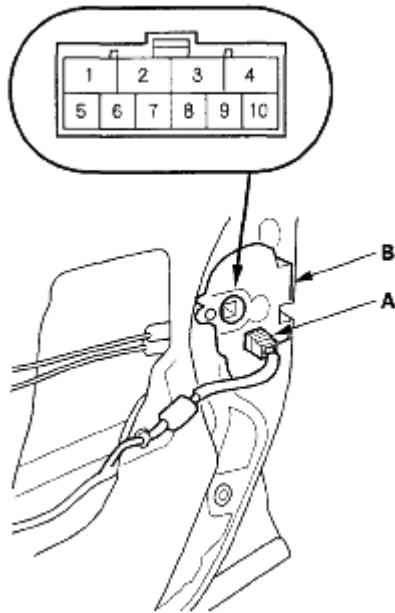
Identifying Front Passenger's Door And Right Rear Door 10P Connector
